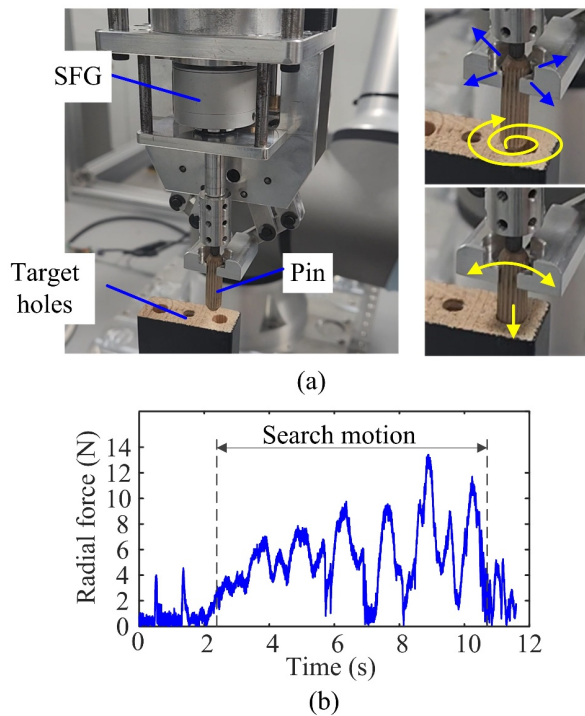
Assembly experiments using (a) peg-in hole strategy and (b) axial force measurement using a force/torque sensor.
